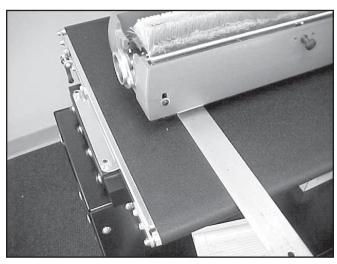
Checking brush alignment and table height adjustment (outboard side).
